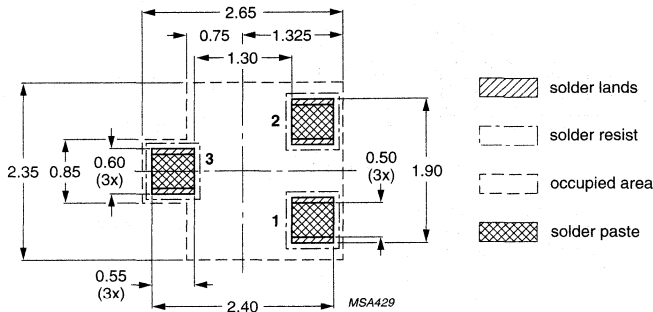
Reflow soldering footprint for SOT223; typical dimensions.
